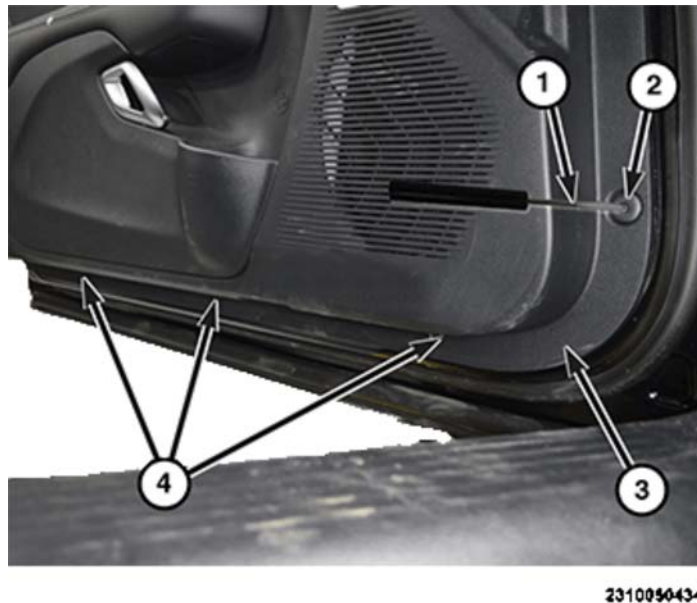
Tool, Fastener, Door Trim Panel & Screws
